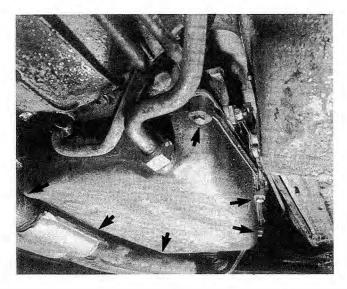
Automatic transmission sump mounting bolts and clamping brackets (arrows).
